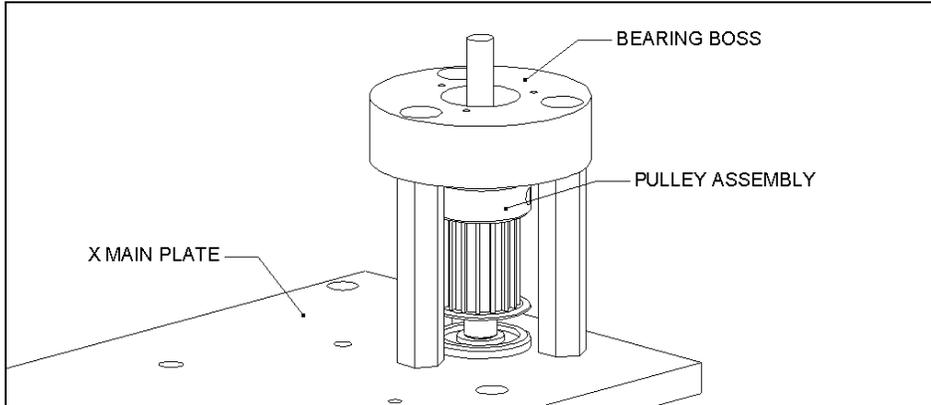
Mounting the Idler Pulley Assembly Onto the X Main Plate
